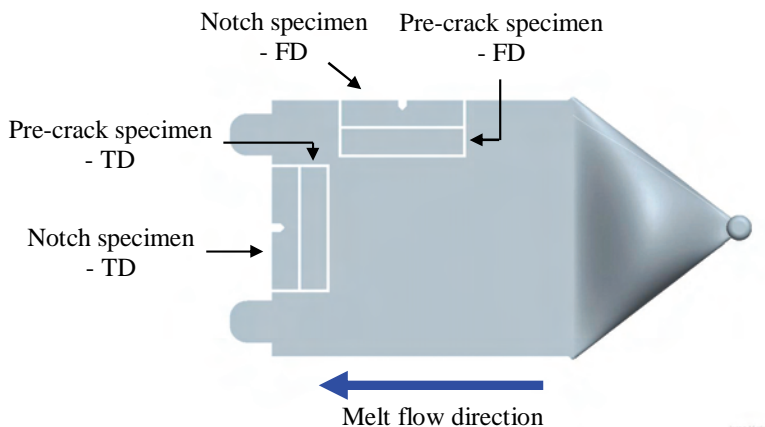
Specimens for the Impact & Indentation Study as sawn from injection moulded test blanks. Note that the pre-crack specimens are shown without the pre-crack.
